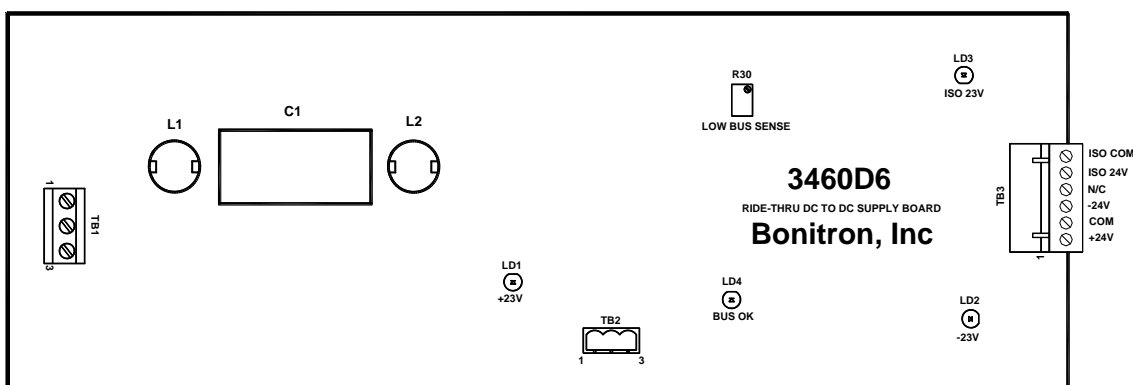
3460D6 Power Supply Board Layout (for 575V)
